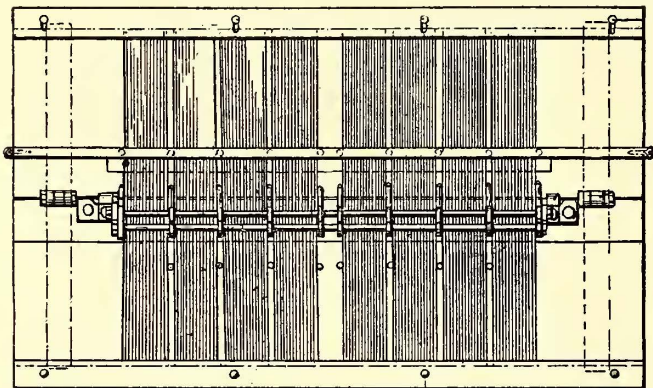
SECTION FRAME AND REEDS IN POSITION ON TABLE
